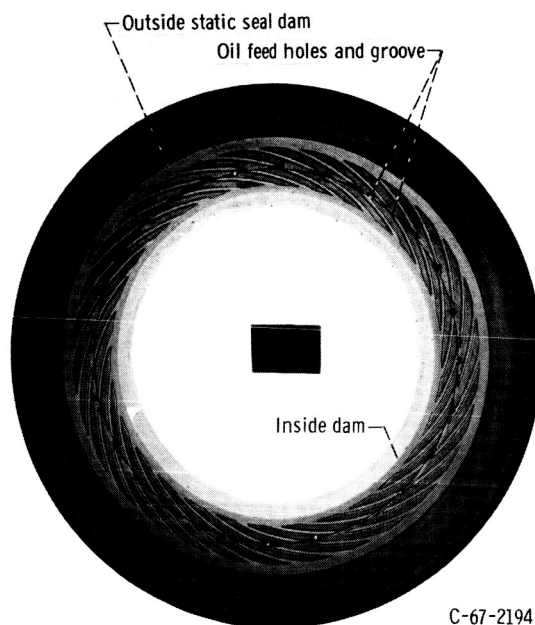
Spiral-feed groove seal geometry chemically etched into brass nosepiece.
